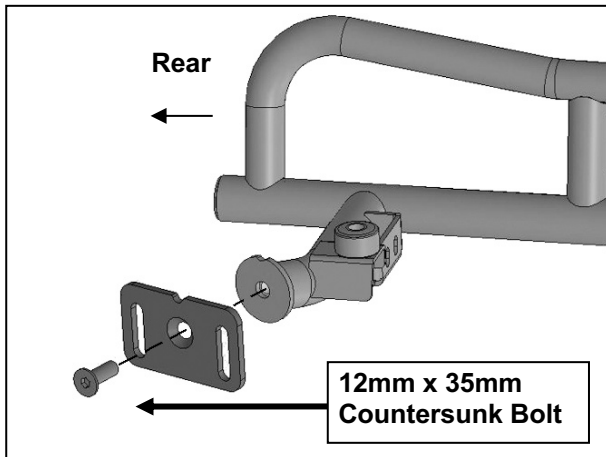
Attach Rubber Bumper to rear mounting tab on Rocker Sliders
